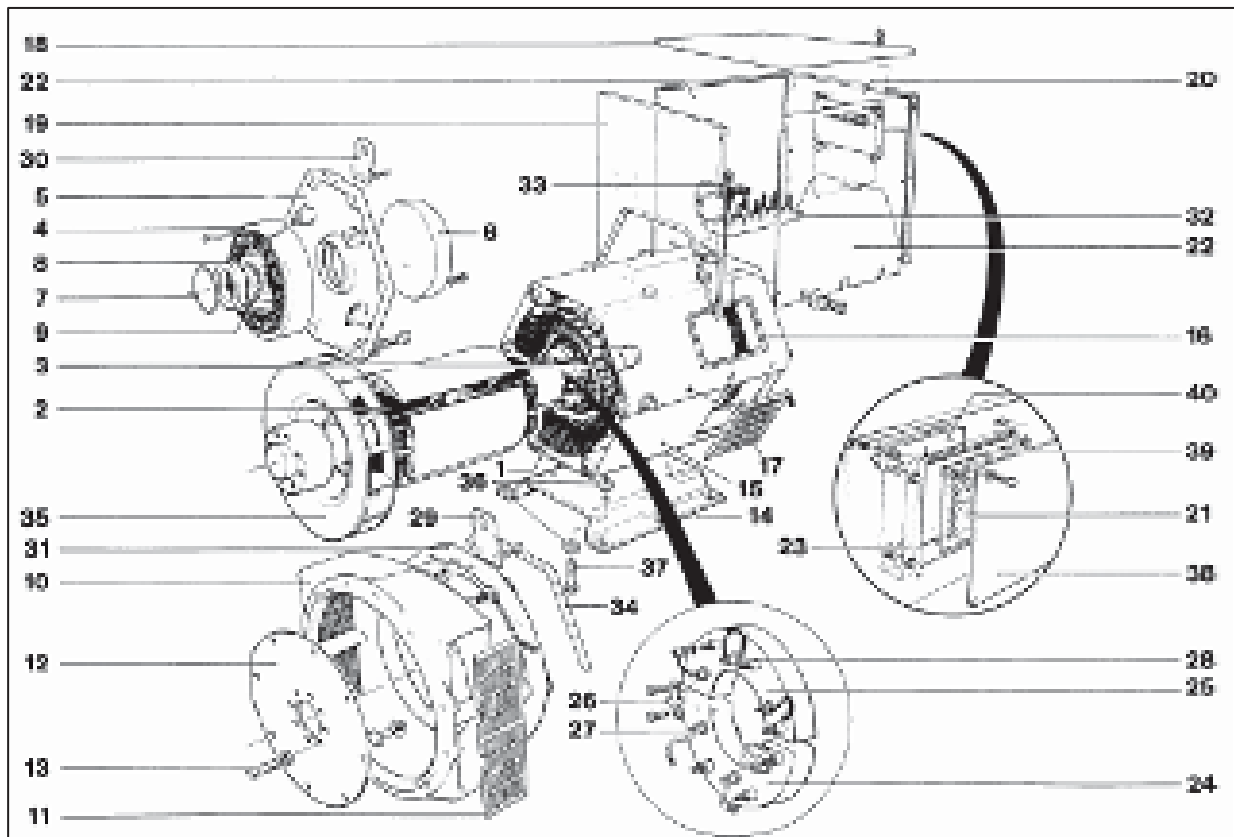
Typical Single Bearing Generator / Alternator Exploded View
